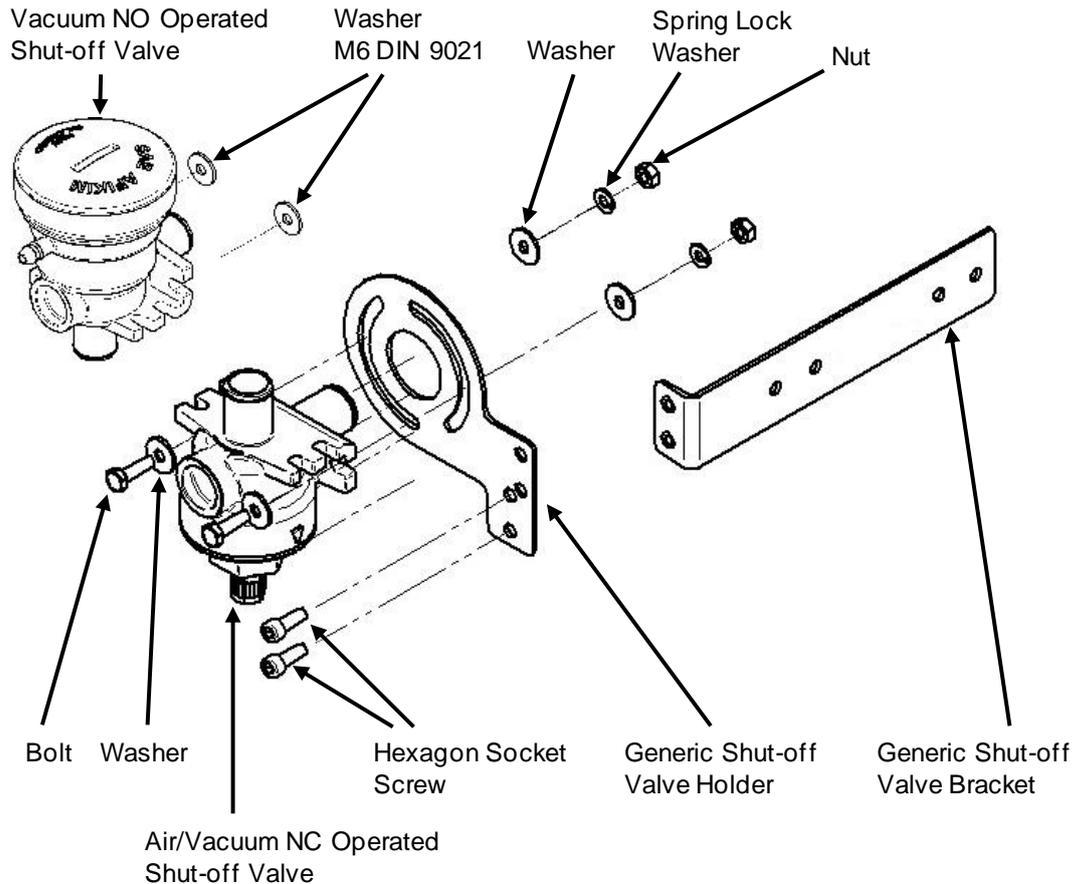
Mounting Shut-off Valve for *AfiFree Body*—Milk Inlet on Right
